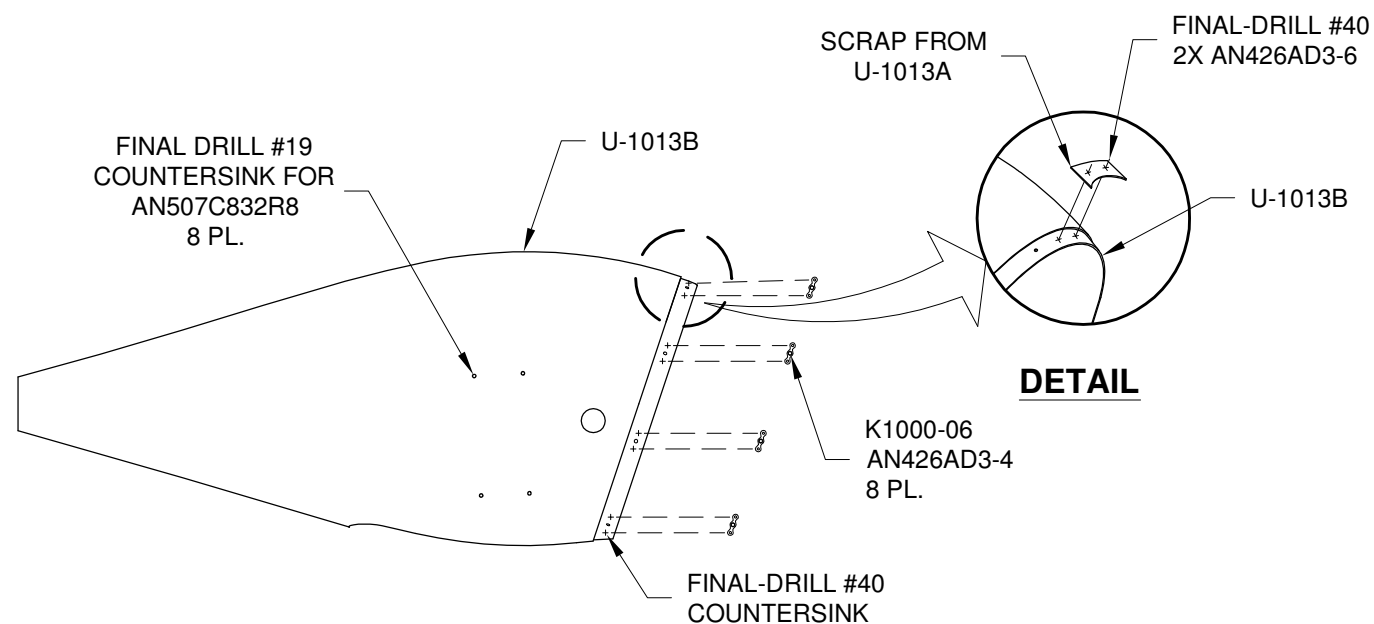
ATTACHING NUTPLATES TO BRACKETS
